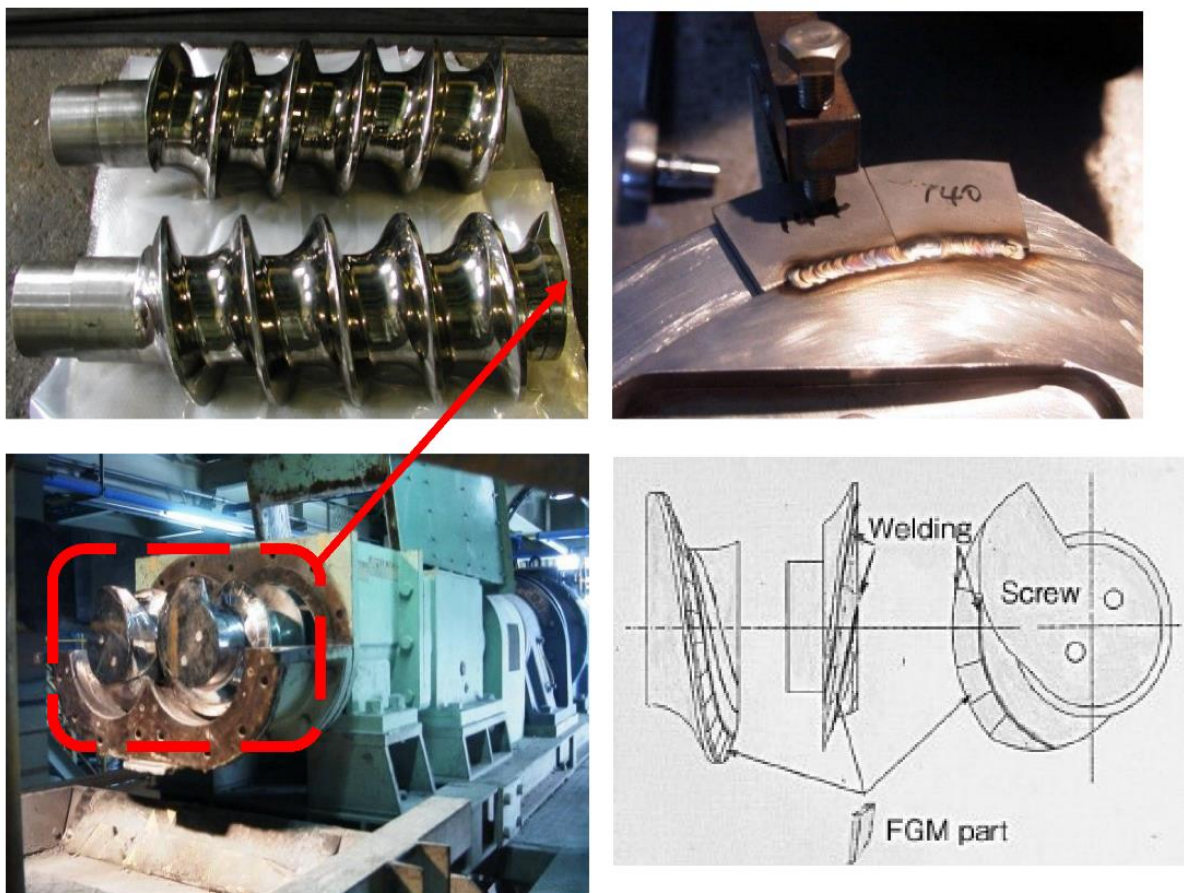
Weldable WC/Ni FGMs tile and the FGMs screw product for the extruding machine.
